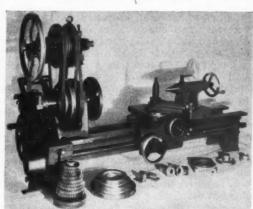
Gears, pulleys and many other parts of the Atlas lathe are die cast from zinc alloys. These parts cost less than finished iron sand castings and are stronger.
